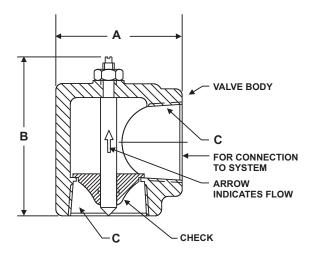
Manifold El-Checks Directional Valves (P/Ns 45-118325-00X and 45-118327-00X)
